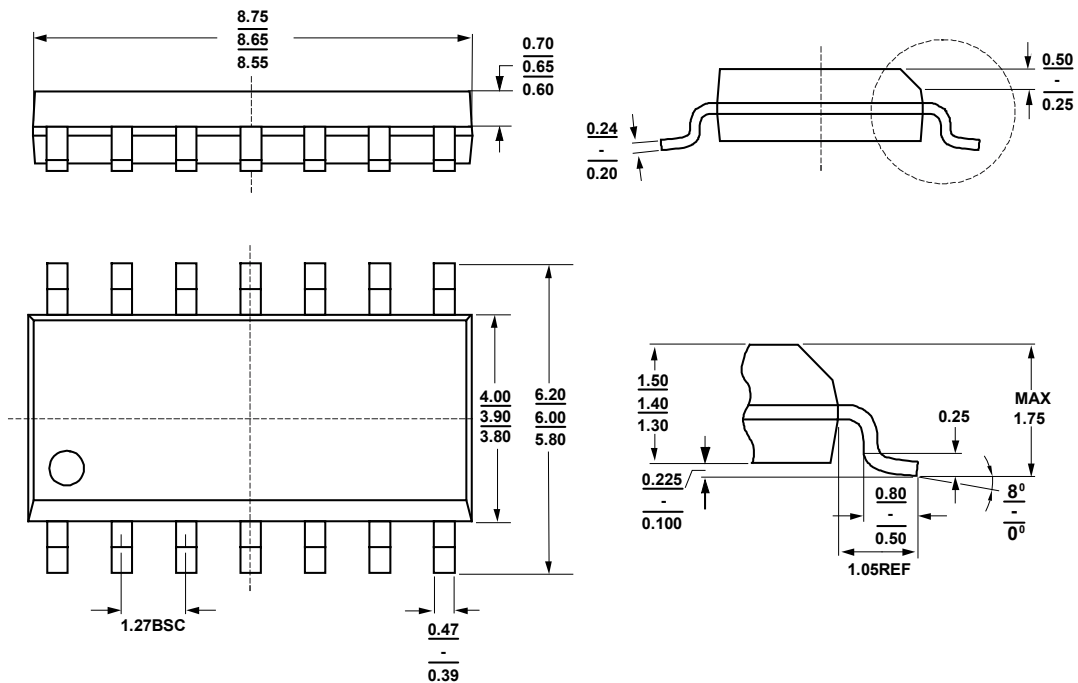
14-Lead SOIC Package Dimensions shown in millimeters
